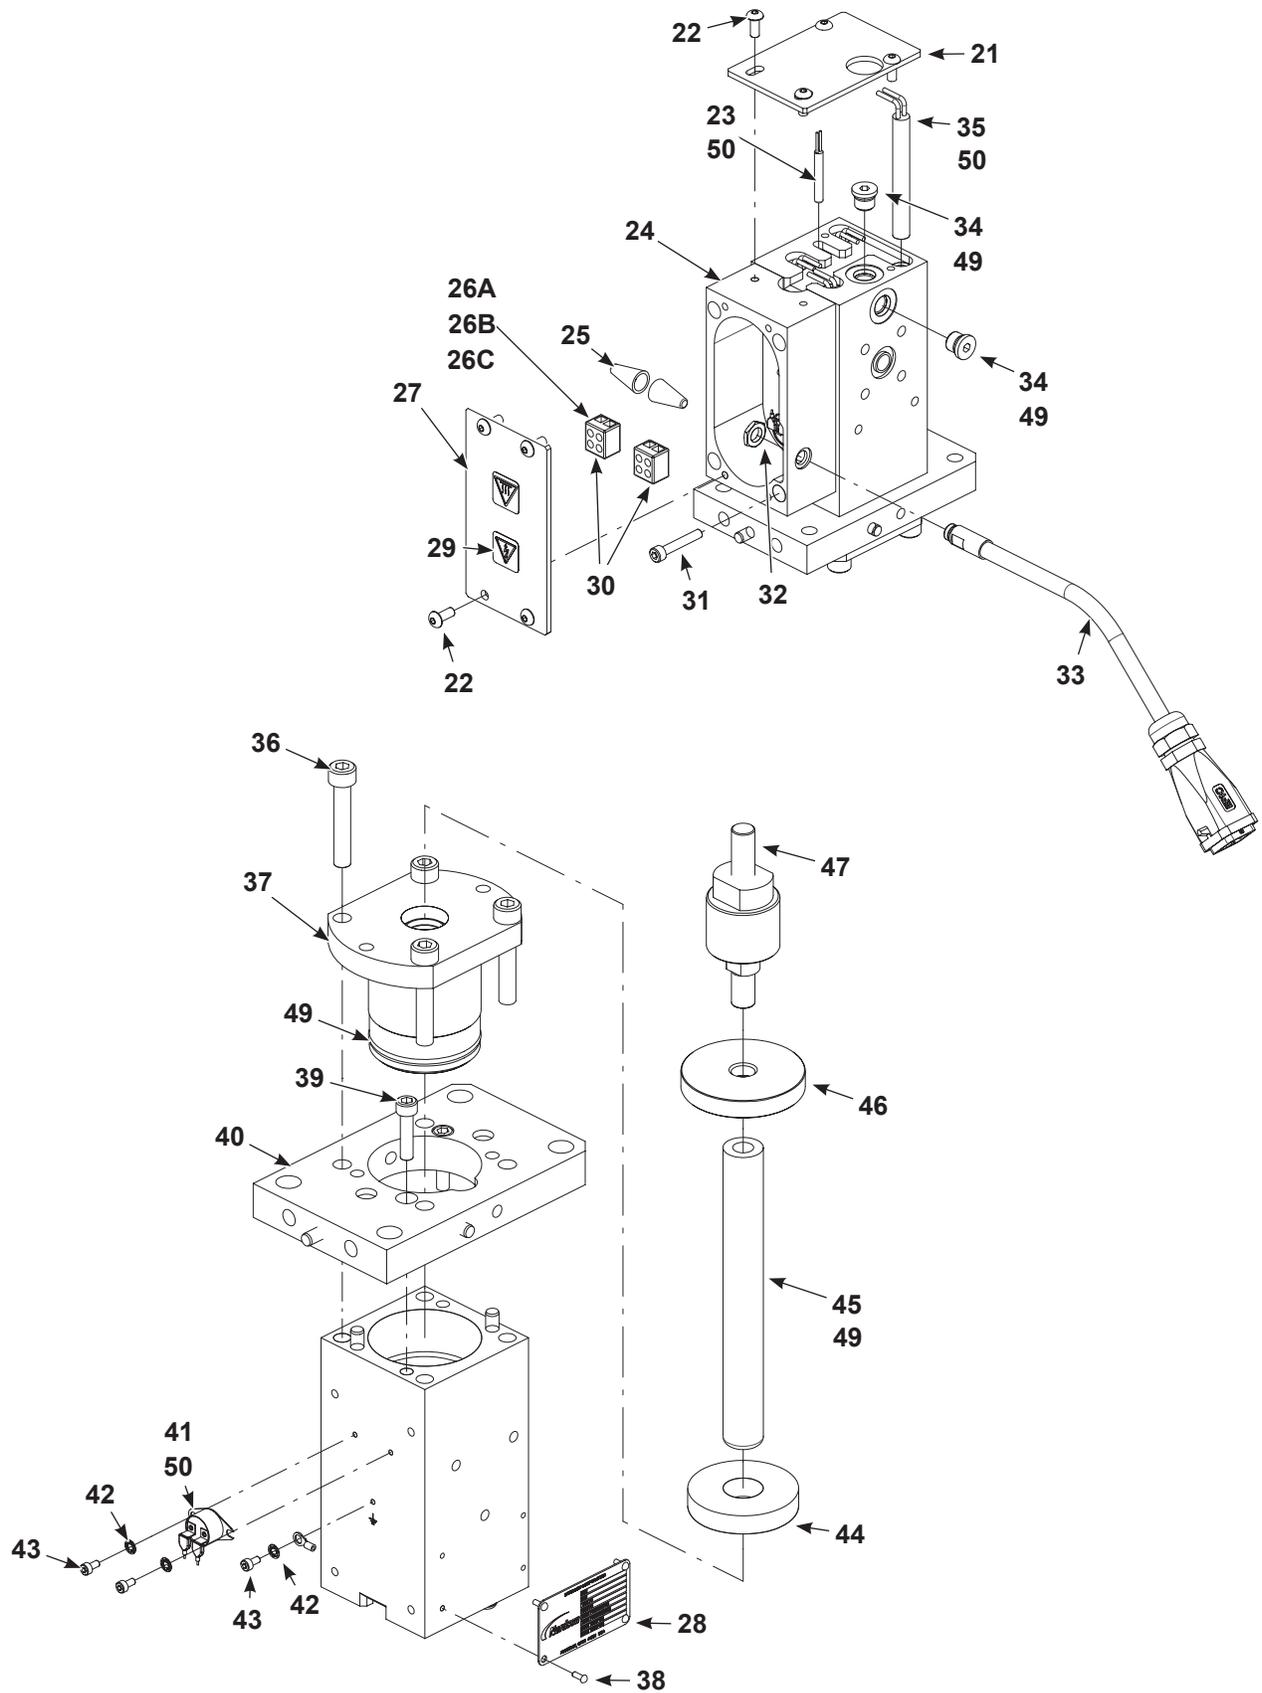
S100 120 Volt Heated Dispenser Parts (Continued)
